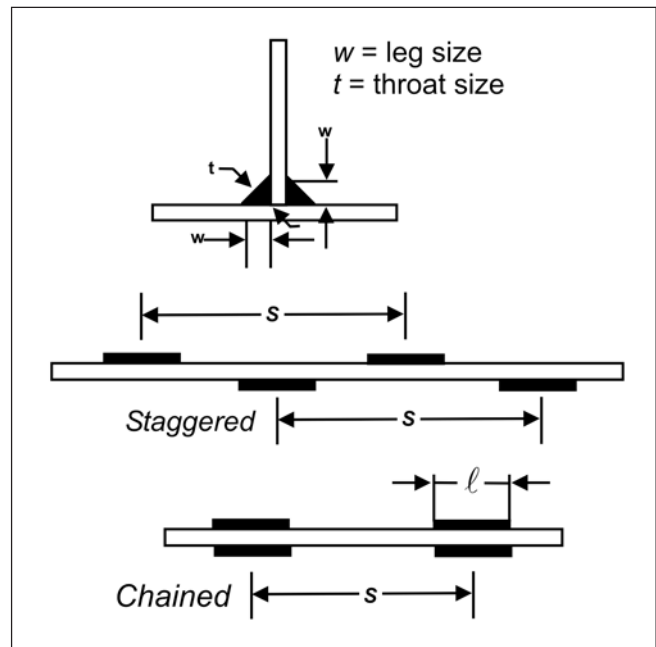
Intermittent welding of attaching the stiffeners to plating.
